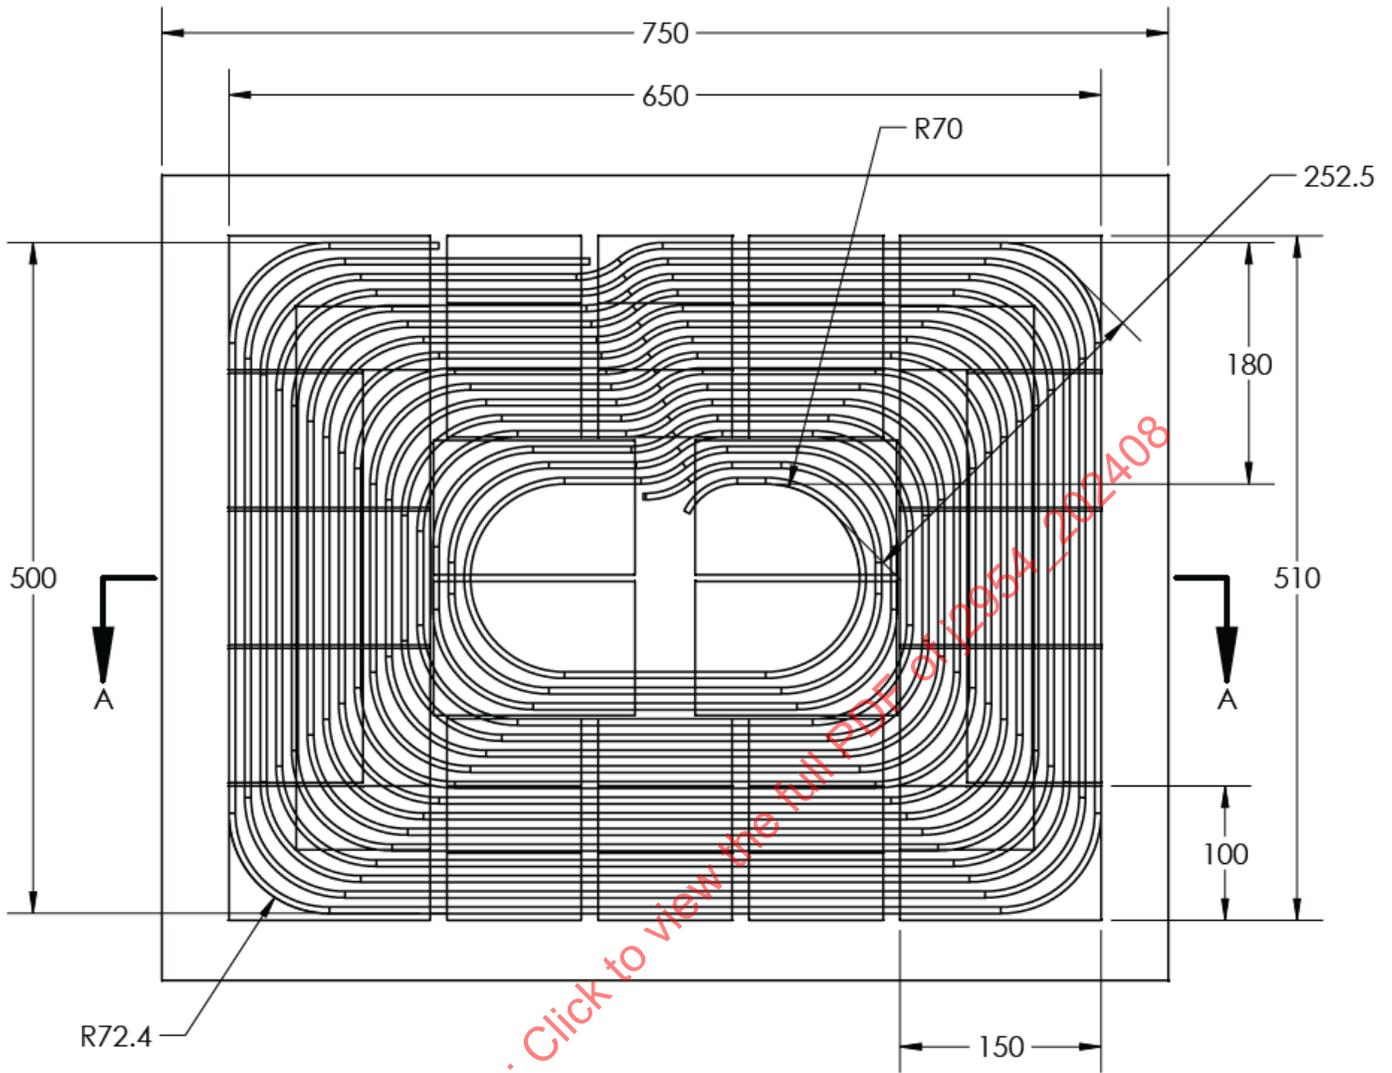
Mechanical dimensions of the Test Station Universal GA
